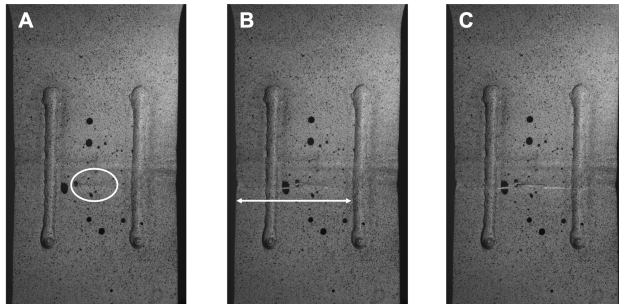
Fracture of specimen with cross weld speed 26 mm/s, without PWHT.
